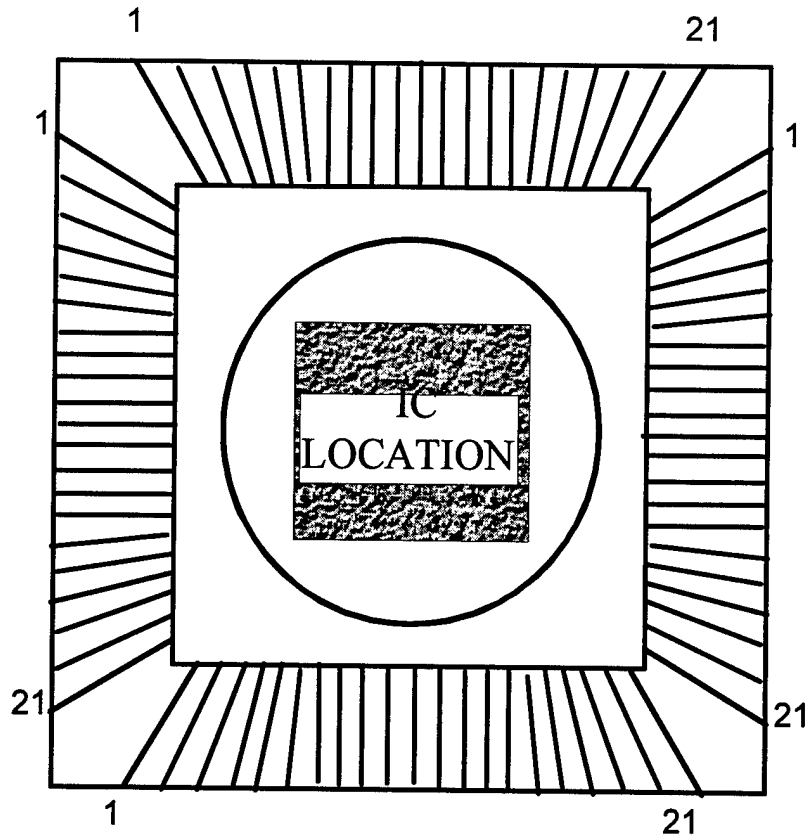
Schematic of 84 pin leadless chip carrier package with hole drilled in IC cavity. The hole, indicated by the circle, is 1 cm in diameter, which is sufficiently large for the IC to fit inside.
